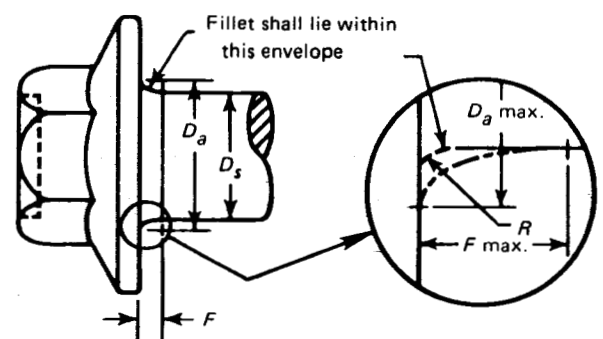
STYLE A FILLET DETAIL FOR LONG SCREWS
